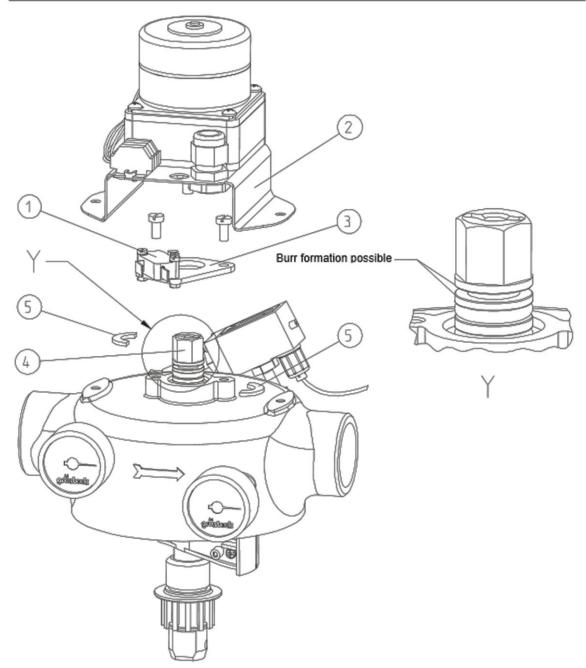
Drawing with item numbers for dismounting pipe nozzle
